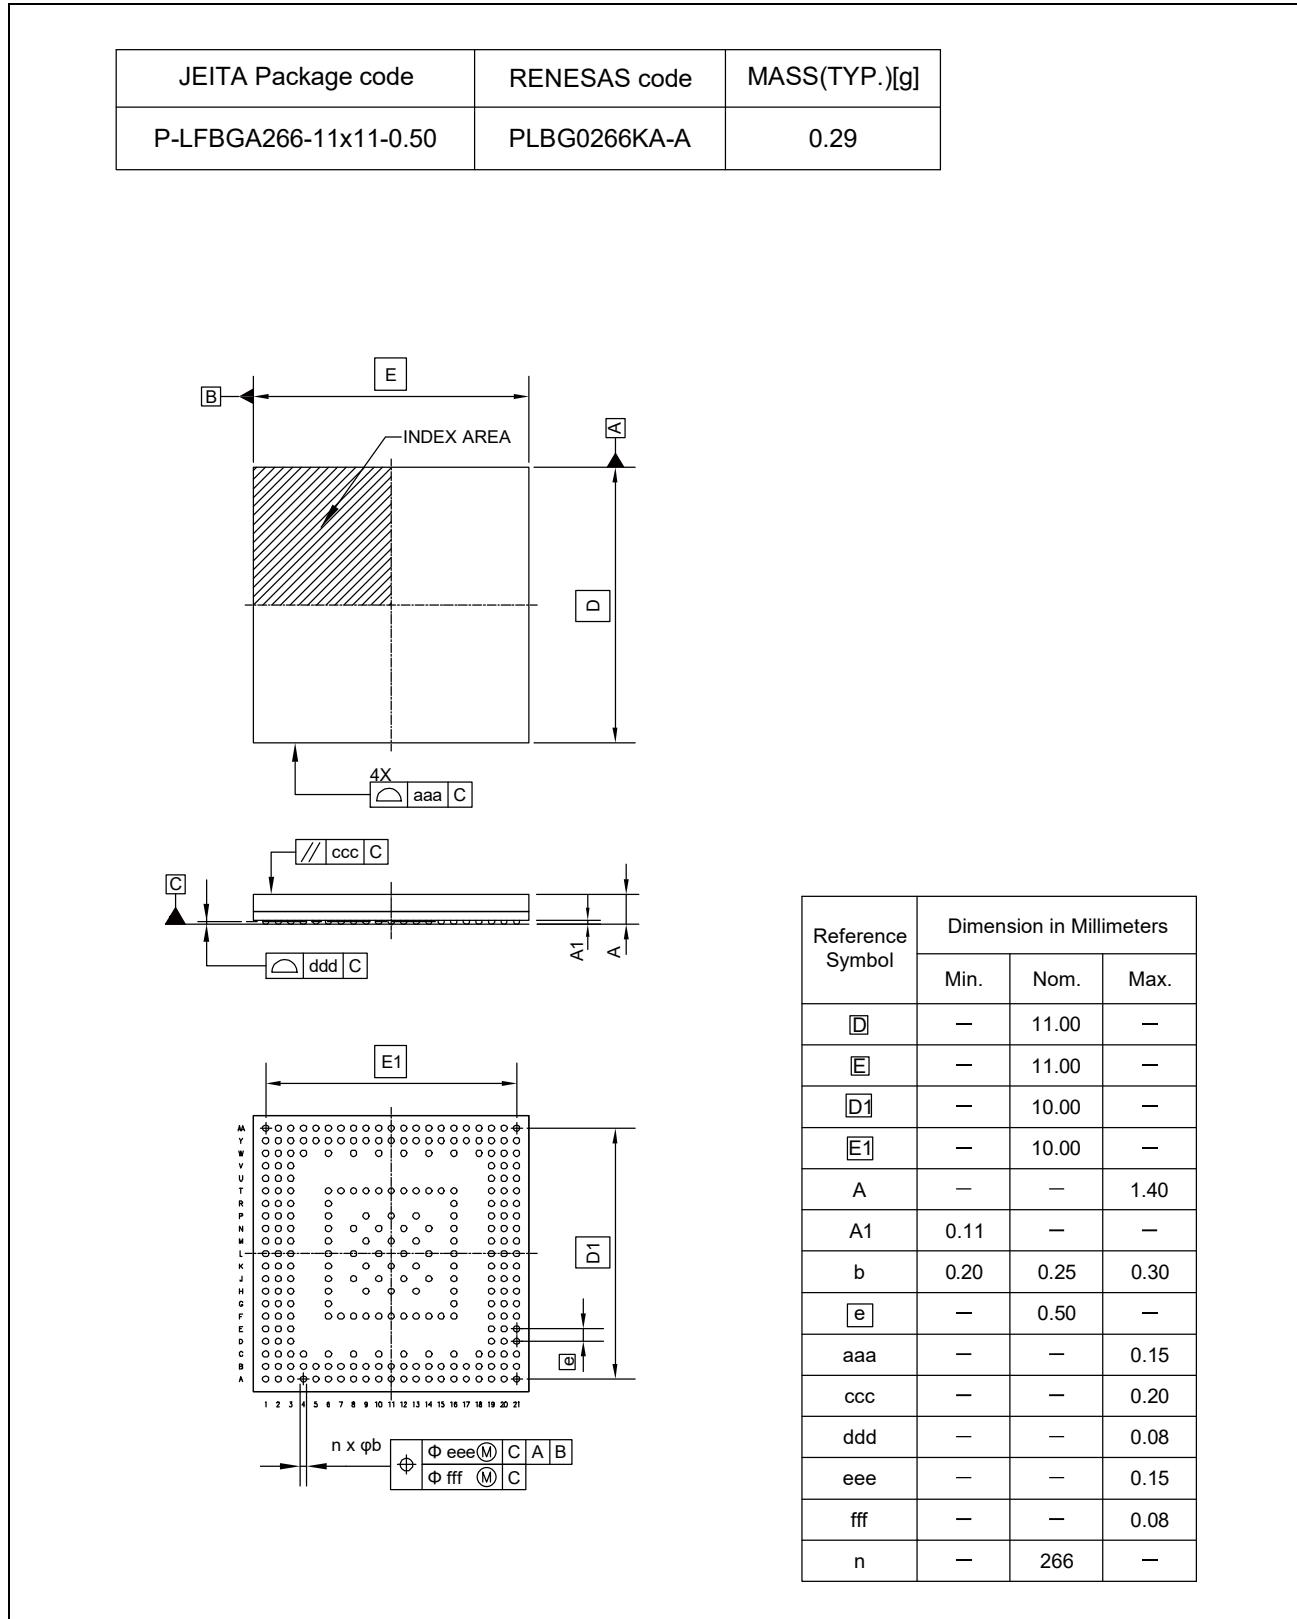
Package Dimensions for LFBGA 11 mm□/0.5 mm pitch/266 pin
